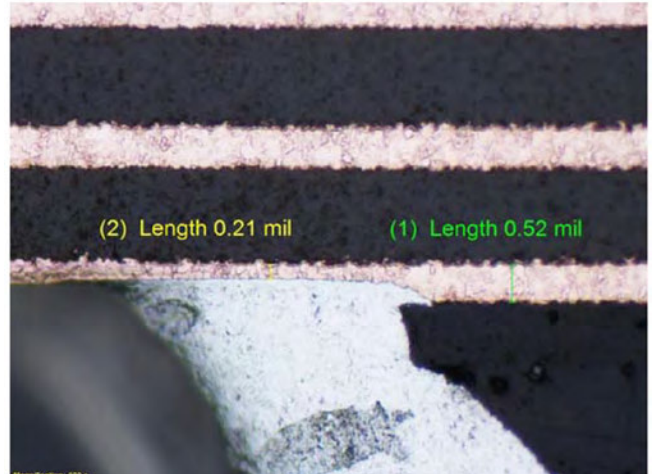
Damaged BGA pad plating structures, micro view.
